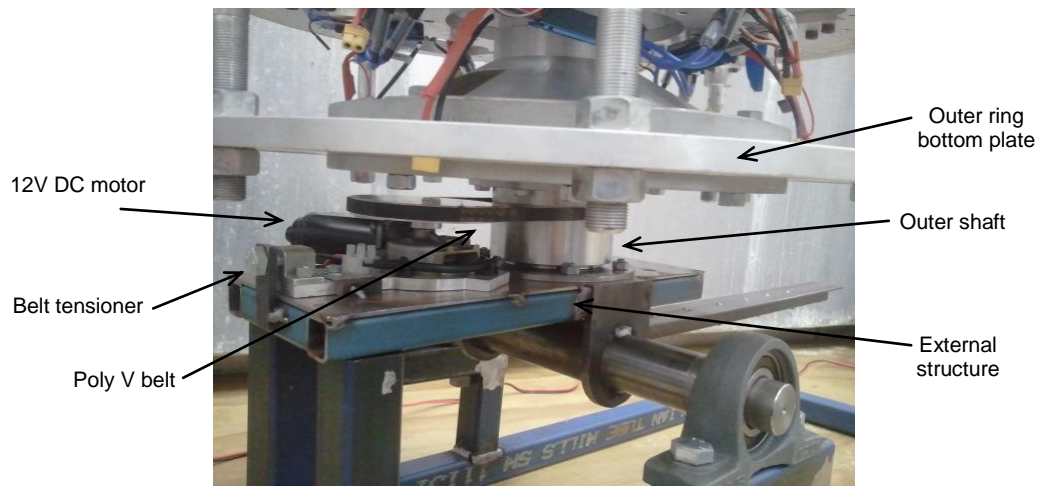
Outer ring drive arrangement assembled into stable platform system
